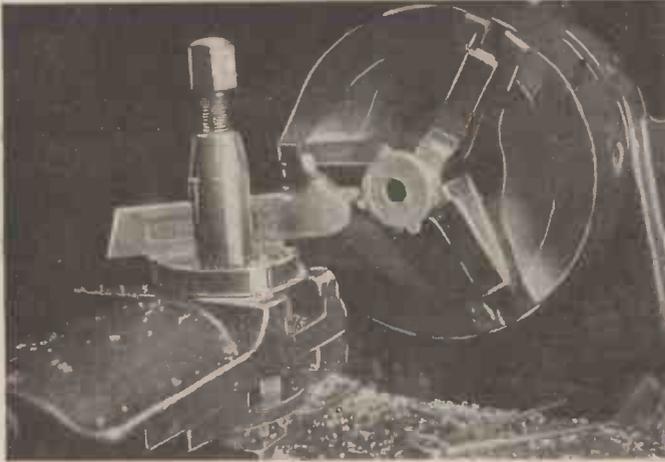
Setting up the main bearing housing (Part No. 3).
